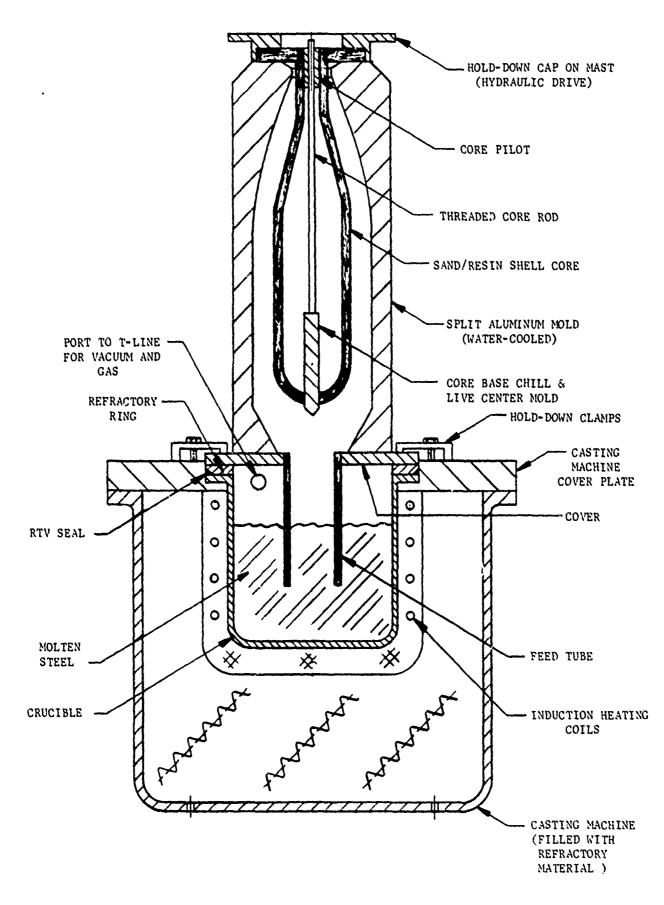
Schematic of Reynolds Pressure Casting Machine.
